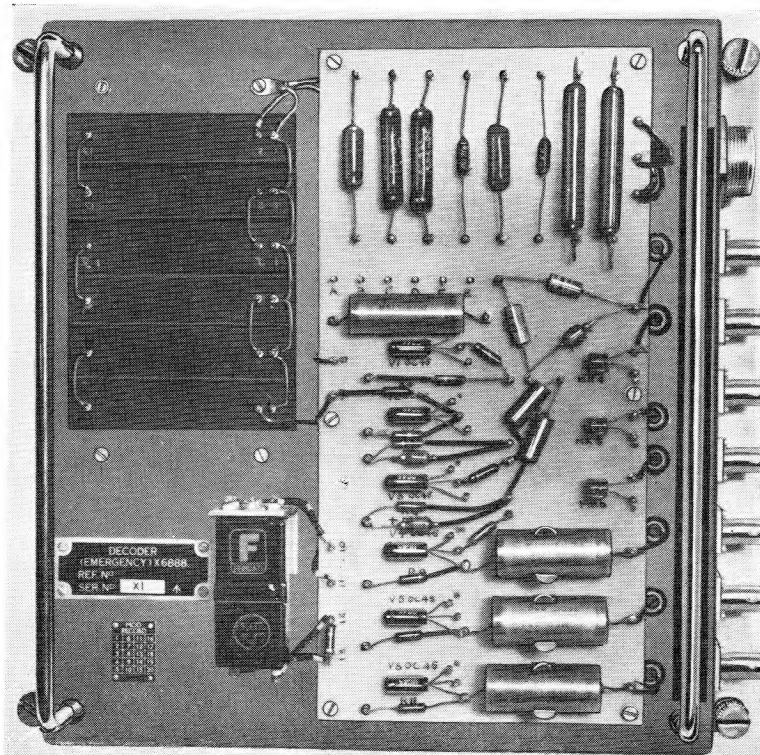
Decoder sub-assembly (emergency) 6888: general view
